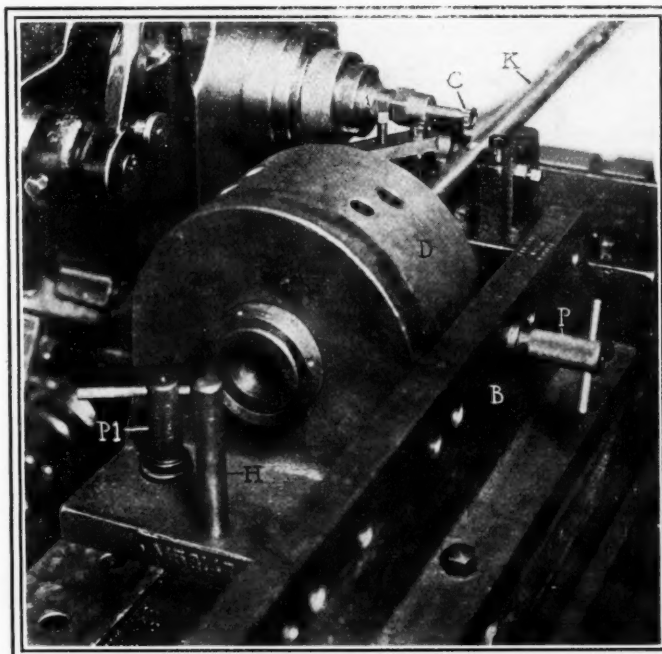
Special machine developed by the Marmon company to cut keyways for camshaft
